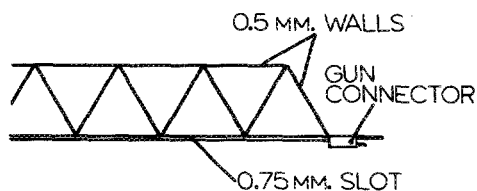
Side view of the end section of truss used for the electron gun support. Each triangular section was removed by electrical discharge machining to leave a 0.5-mm wall. The lower 0.75-mm slot is for housing electrical wires which connect the gun-connector pins to a vacuum feed-through. Overall truss dimensions are: length = 1.0 m, height = 2.5 cm, width = 1.25 cm.
